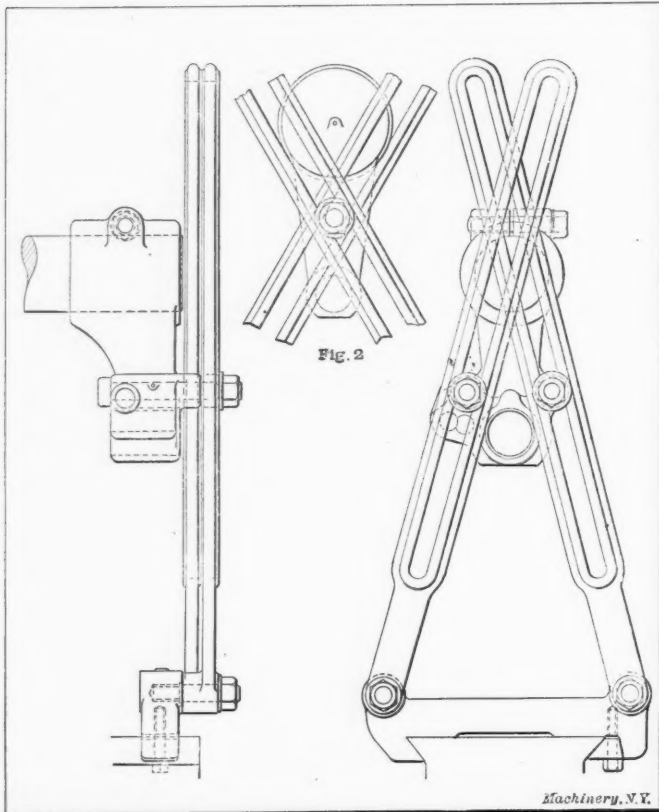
Slotted Braces used on Brown & Sharpe Light Milling Machines.
